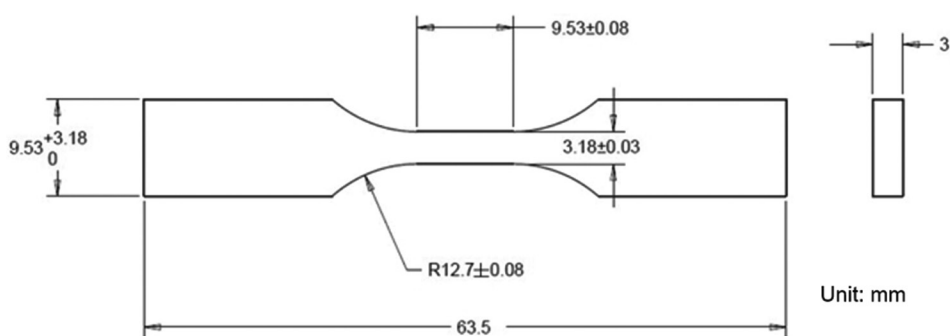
Specimen dimensions for tensile testing based on ASTM D638-14 type V standards
